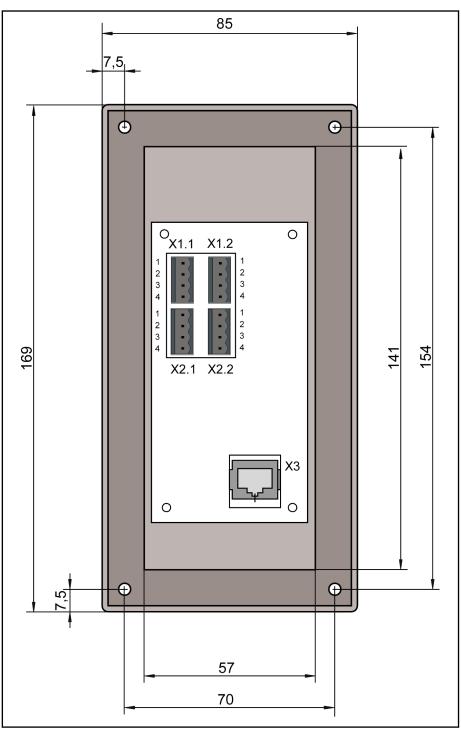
Housing and mounting dimensions: IndraControl VAC 30.2
